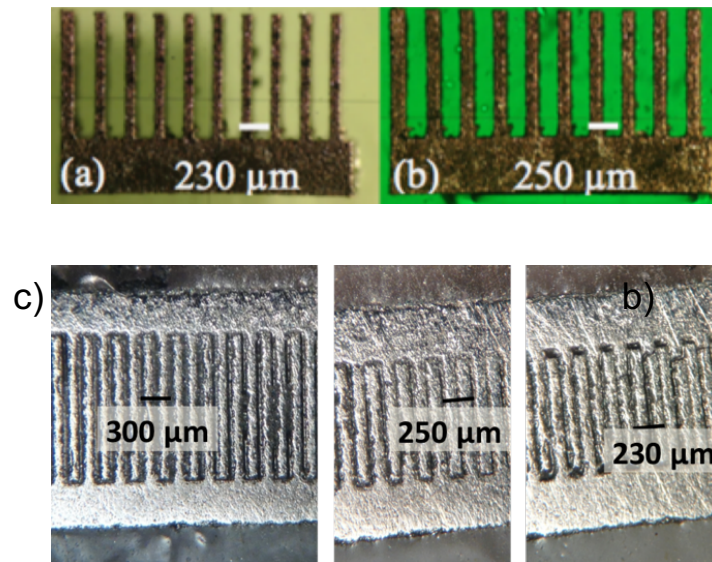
Photographs of a) & b) laser machined and c) laser machined and polished magnet arrays of various widths
